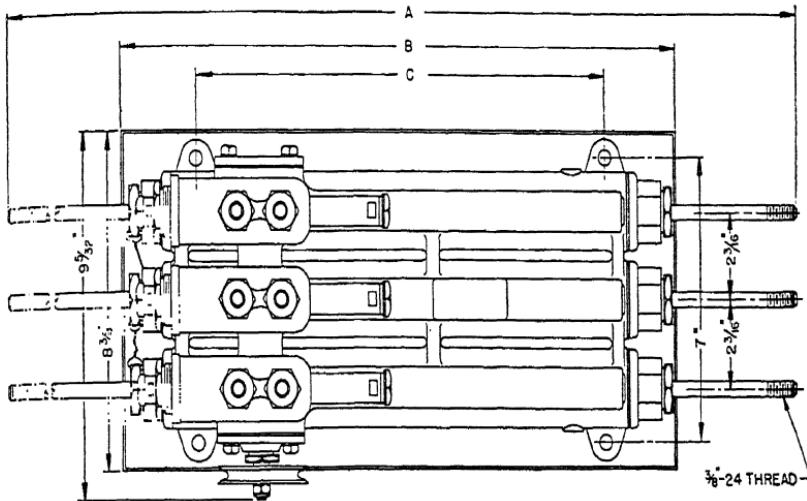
Principal Dimensions of the Control Units in the Mounting Unit
